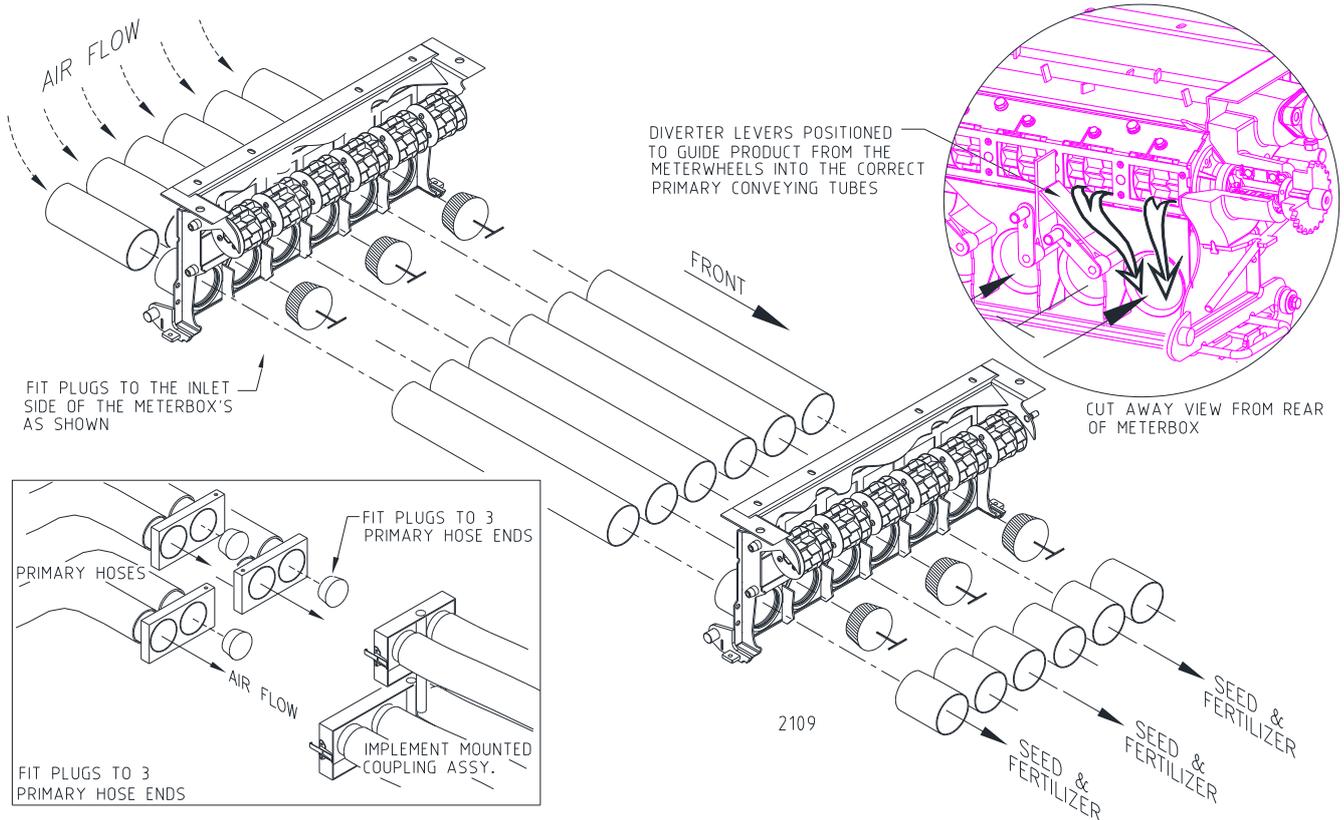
Possible example for wide row (summer) cropping using diverter blades to direct product down 3 of the 6 primary tubes and plugging air flow on the un-used primary delivery tubes.
